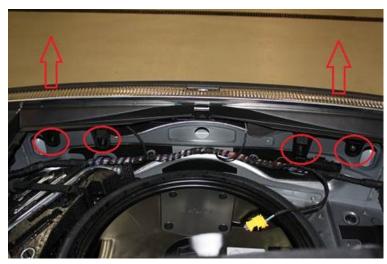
Rear cargo area trim plate removal. The T25 Torx® screws to be removed are circled in red.
